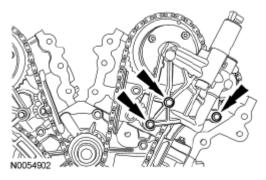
Locating RH VCT Housing Bolts Courtesy of FORD MOTOR CO.
